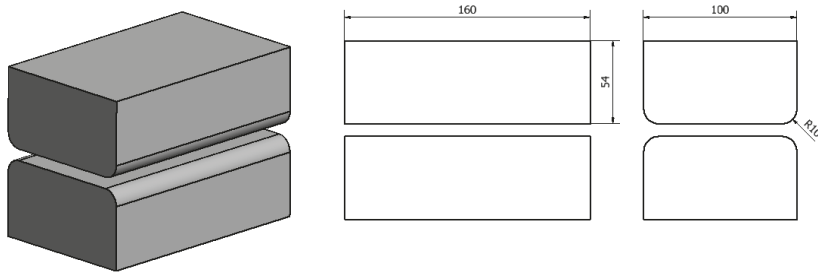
Shape and dimensions of flat dies used for AZ91 magnesium alloy forging [15].
